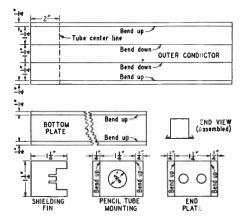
Flashing copper parts of the 420-Me, tank circuits. The outer conductor (top sketch) is 10 inches long for the line using miniature tubes, or 12 inches for the pencil tube model. The middle drawing shows the bottom plate (left) and an end view of the assembled line. At the bottom left is the shielding fin used with the miniature tubes, and at the middle is one of the two plates needed for mounting the pencil tube. These plates should be tailored to fit the line assembly after it is bent up. They are soldered in place, two inches from the end of the trough. The right-hand plate is fastened in the end of the trough, the two holes being for the heater by-passes, C₂ and C₃.
